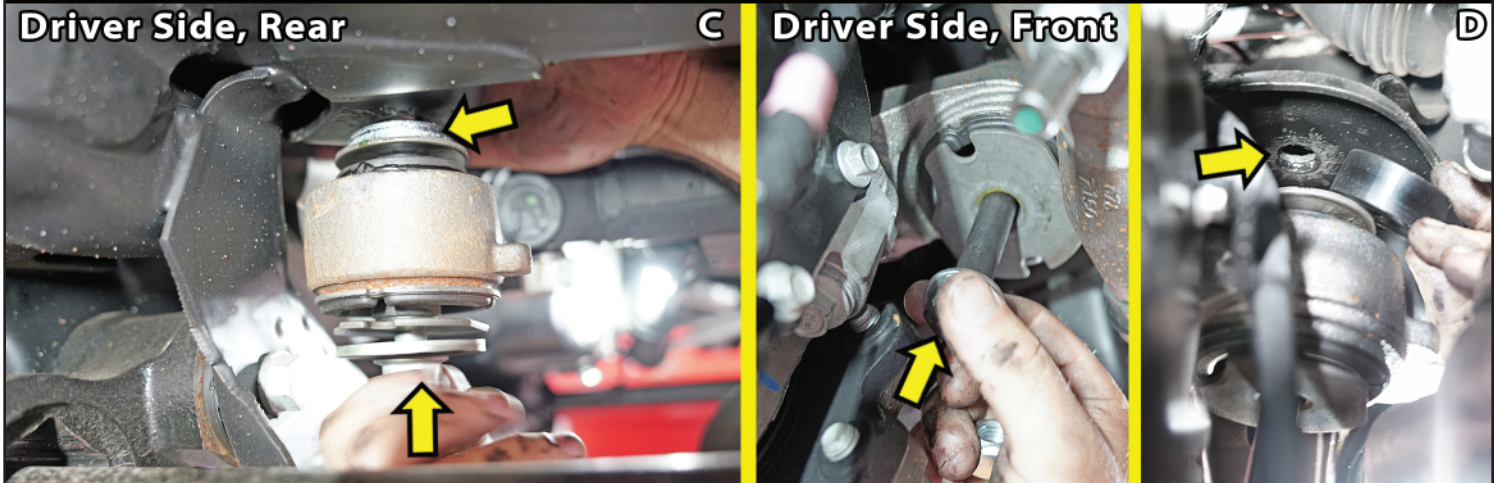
D] On the front differential mounts, place a 14mm flat washer onto a 14mm x 120mm bolt. Insert the bolt up through the differential mount. Insert the #55-04-3340 spacer (Thick-UHMW Plastic) and run the bolt through the spacer and into the frame mount. Attach with 14mm nut. [22mm | 22mm].
